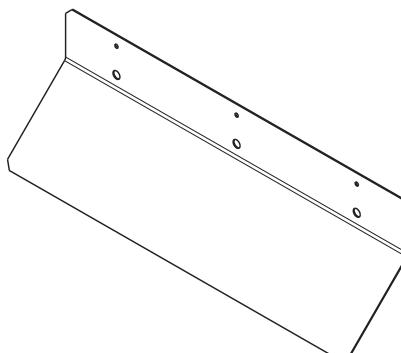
Inlet Hood Assembly (6 in. and 14 in.)
